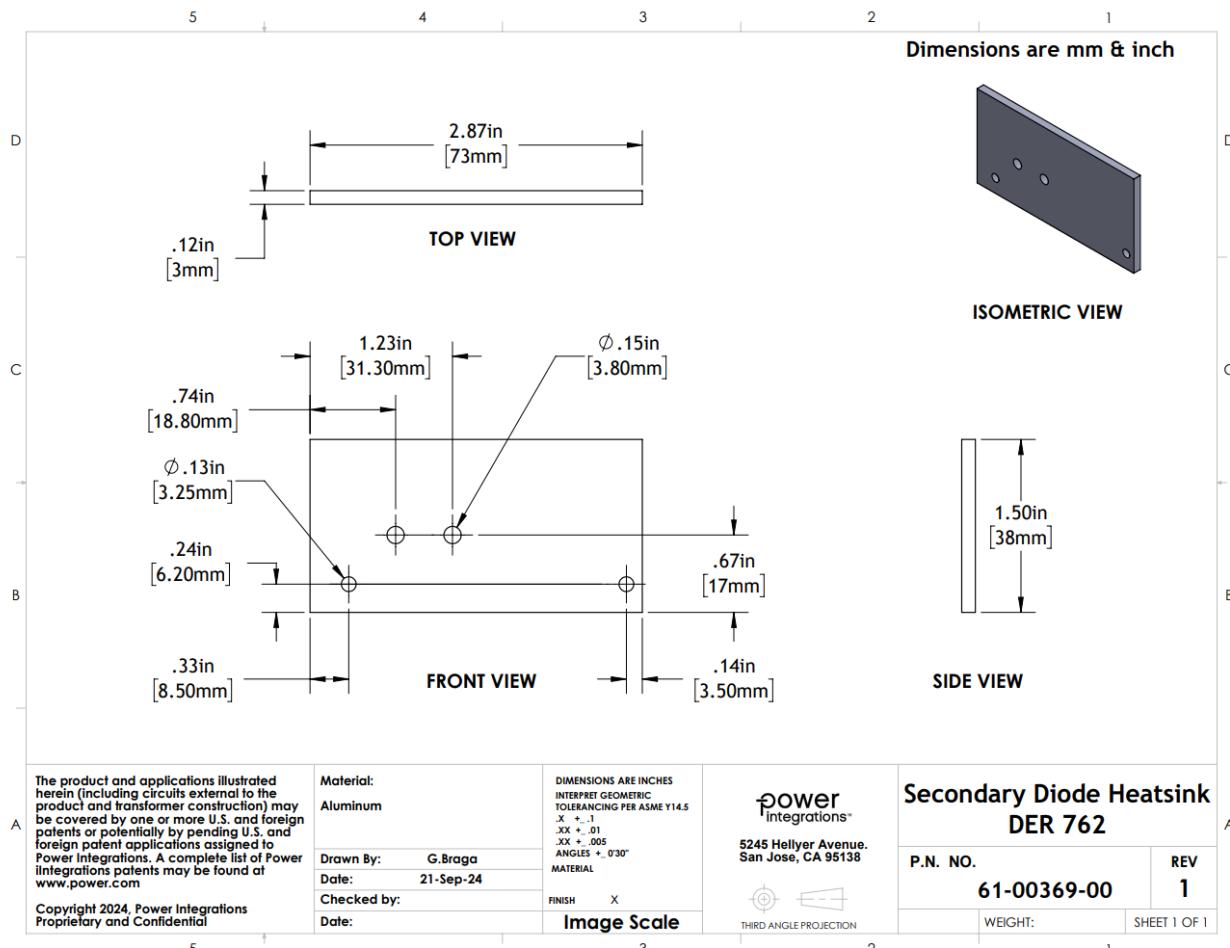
DER-762 Secondary Diode Heat Sink Metal Drawing.
